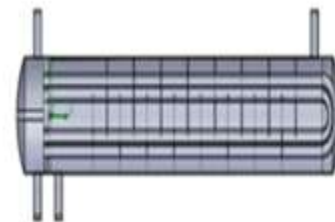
2-D Design Of Shell Tube Heat Exchanger
